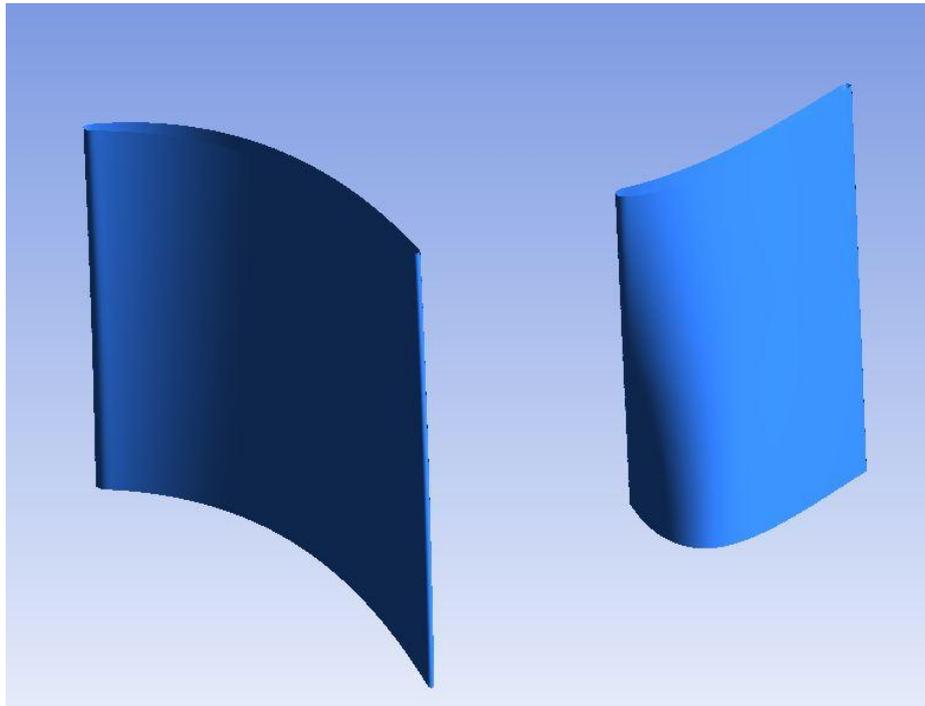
The generated stator and rotor blades using SOLIDWORKS
